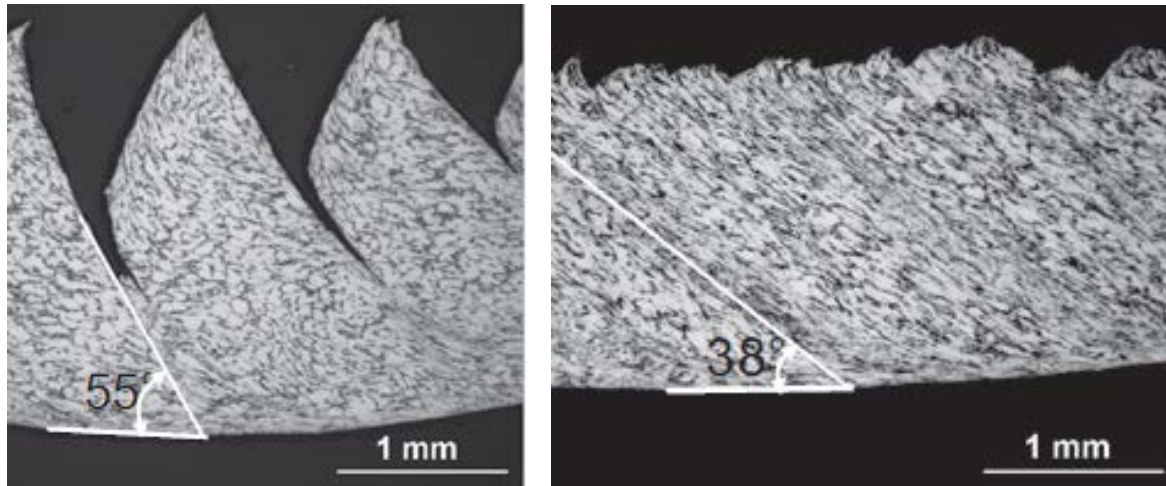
Segmented and continuous chips from same workpiece at similar cutting condition (Sun et al., 2009).
